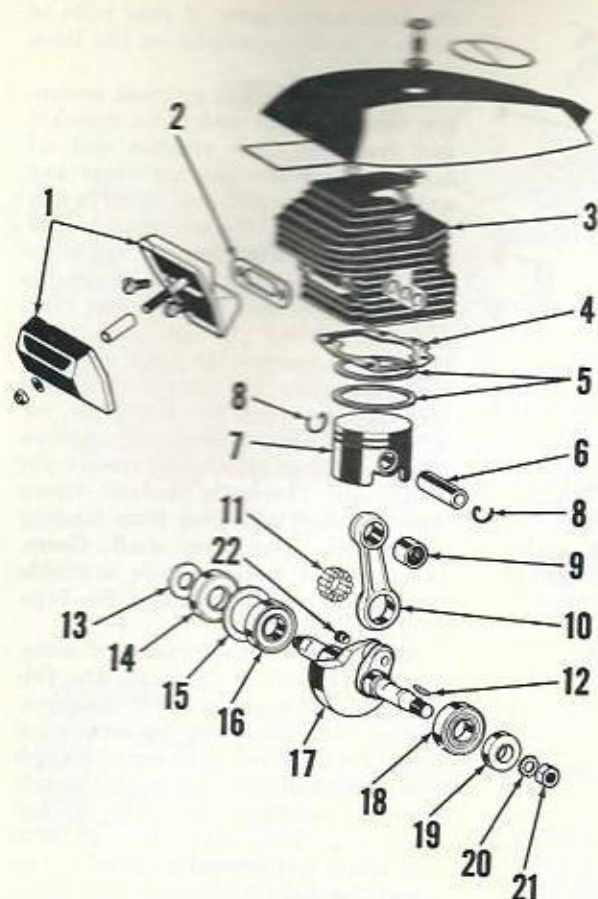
Exploded view of cylinder block, piston, rod and crankshaft assemblies used in engines of models 340, 945, 1630, 1631, 1644, and 1645. Plug (22) can only be purchased with crankshaft (17) as an assembly to retain engine balance.
